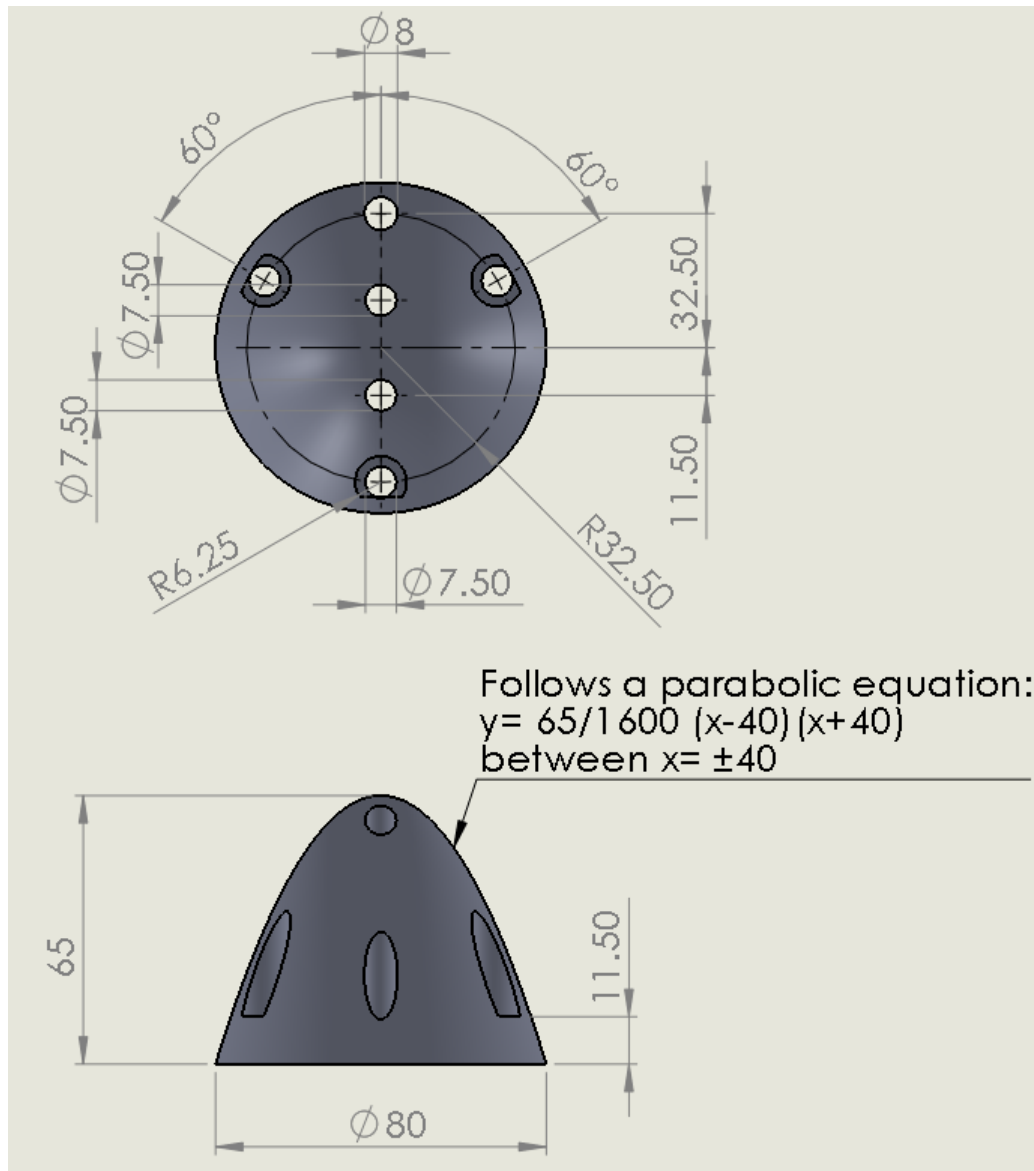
Dimensioned drawing of the top parabolic radiation shield.
